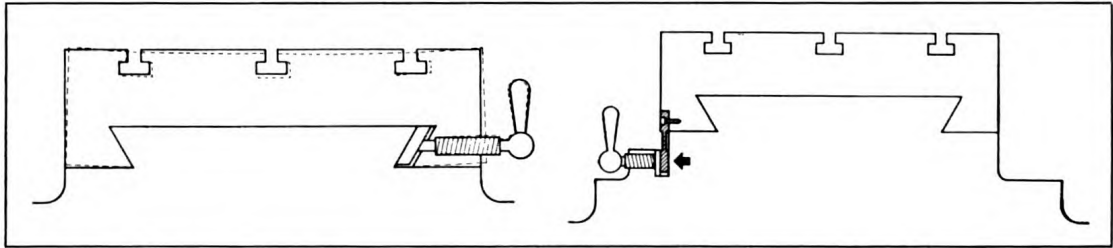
Clamping against gibs (left-hand view), although conventional in many machines, is not sufficiently accurate for locating machines like the Jig Borer, Jig Grinder, Form Grinder or Measuring Machine. Spring and shift of all related parts can easily introduce a table movement of .001". A special clamping blade on all Moore machines permits rigid locking but is transversely flexible enough to eliminate displacement of the table.
